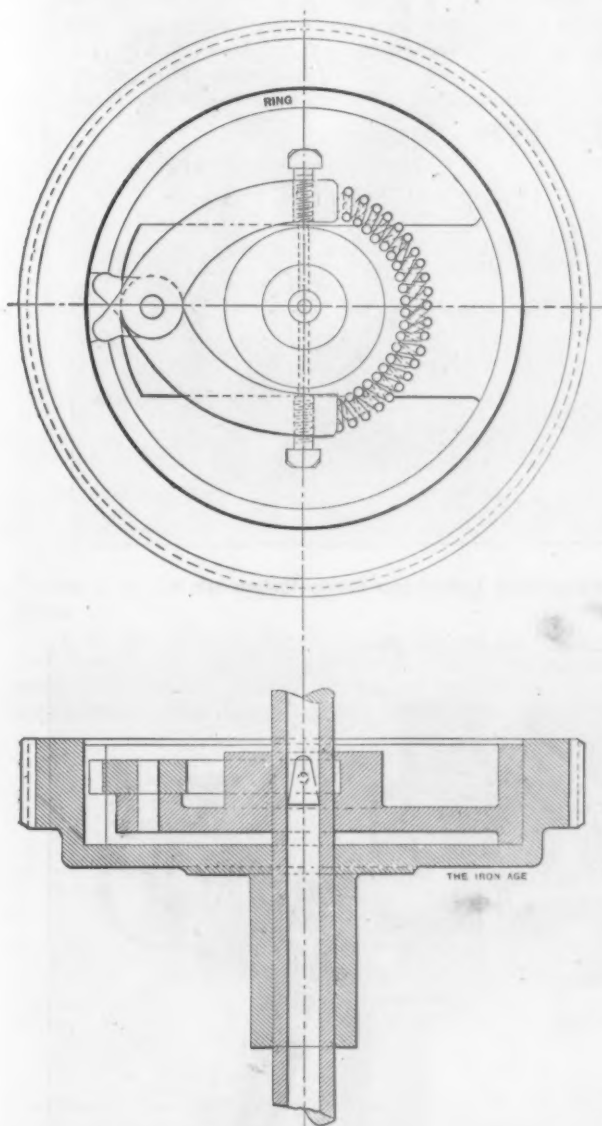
Details of Construction of the Clutch Used in Starting and Stopping the Machine.
